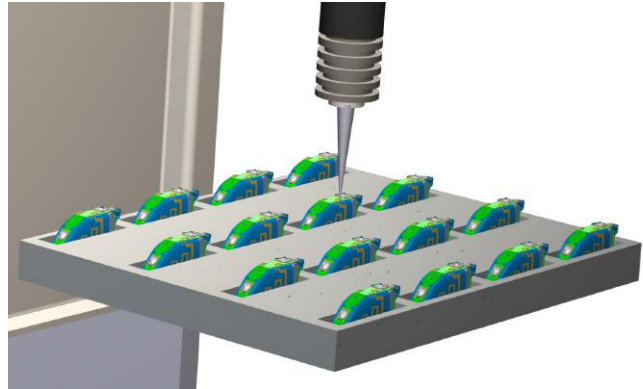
Solder paste dispensing and surface mounting process chain.
